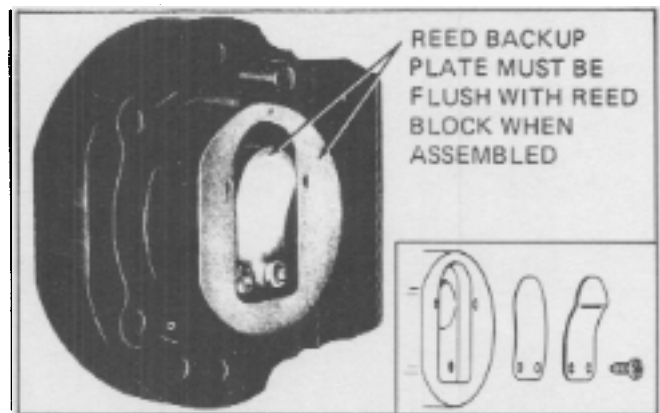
Reed plate and carburetor mount assembly showing reed plate, reed backup and mounting screws.
